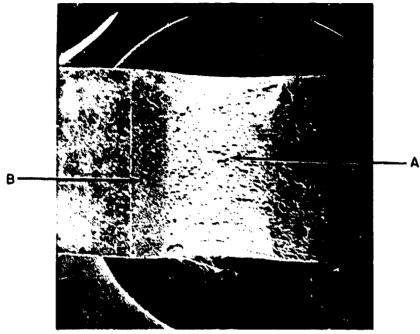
Fracture surface of a hydrogen-embrittled A-514 plate fatigue specimen, 8x.
